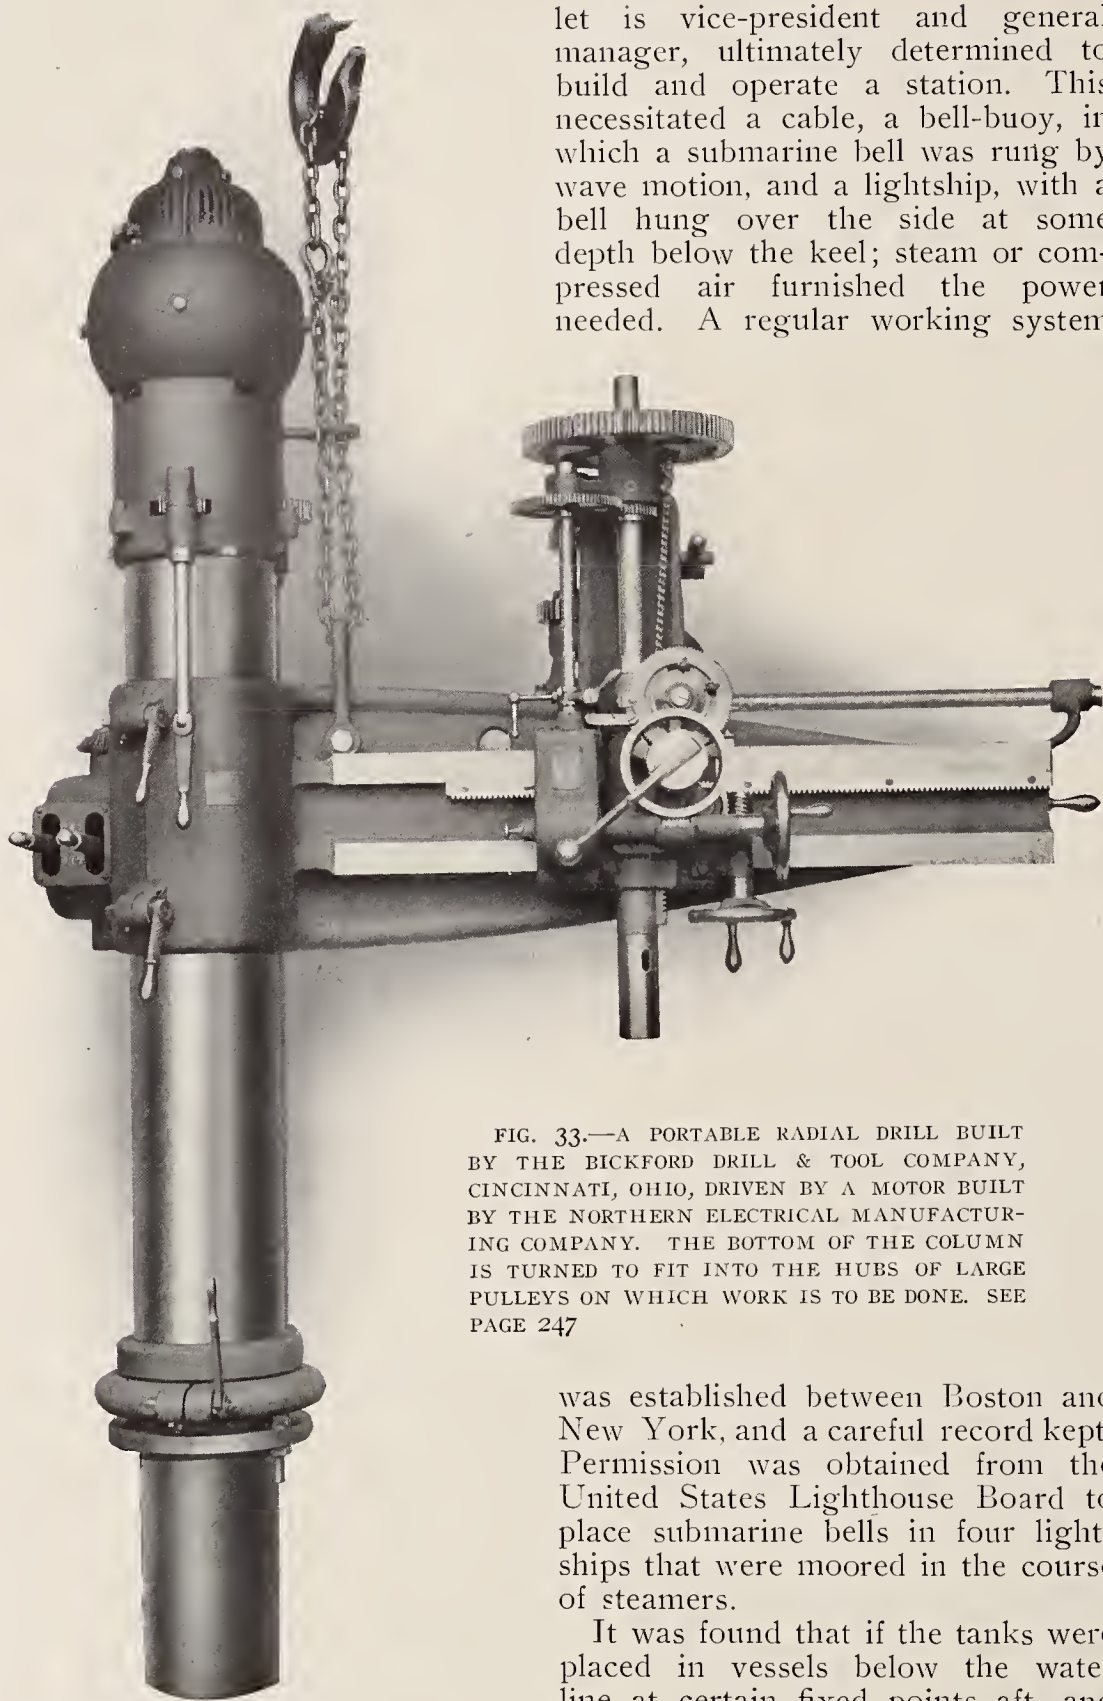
A PORTABLE RADIAL DRILL BUILT BY THE BICKFORD DRILL & TOOL COMPANY, CINCINNATI, OHIO, DRIVEN BY A MOTOR BUILT BY THE NORTHERN ELECTRICAL MANUFACTURING COMPANY. THE BOTTOM OF THE COLUMN IS TURNED TO FIT INTO THE HUBS OF LARGE PULLEYS ON WHICH WORK IS TO BE DONE. SEE PAGE 247
